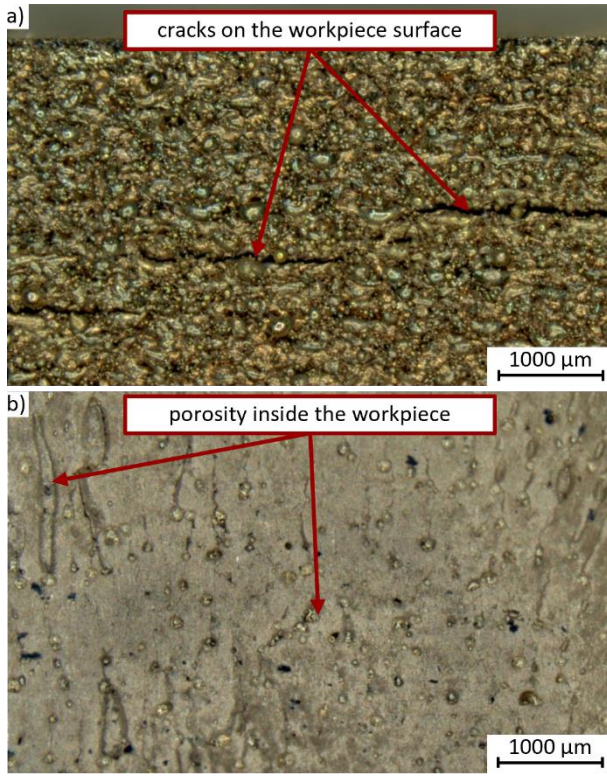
Microscopic images of the CuSn20 workpiece manufactured at $P_L = 350$ W and $t_{exp} = 50$ μ s; a) Workpiece surface; b) Cross-section of the workpiece.
